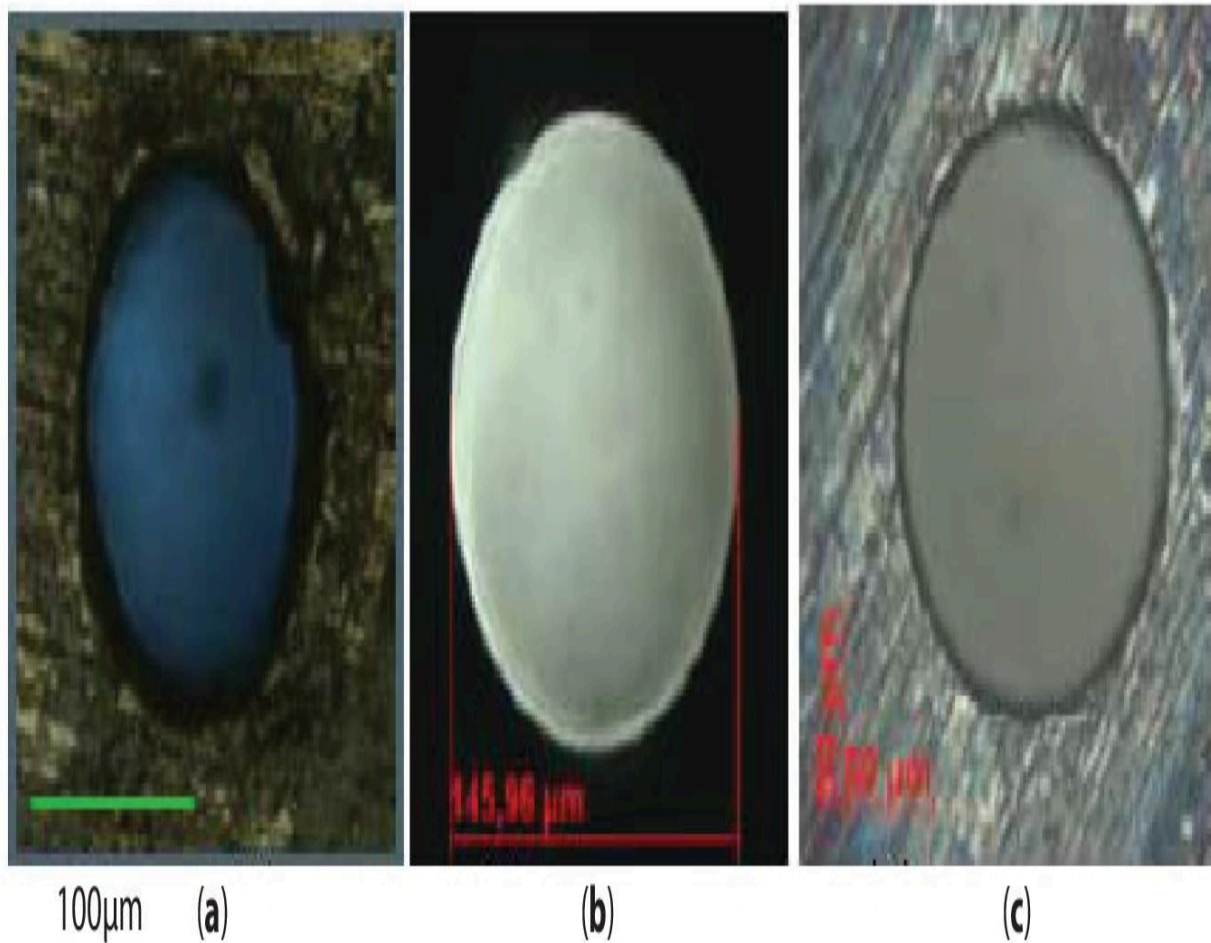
Drilled holes by different processes; (a) Laser pilot hole; (b) EDM drilled hole; (c) hole drilled by laser-EDMM processes [39].
